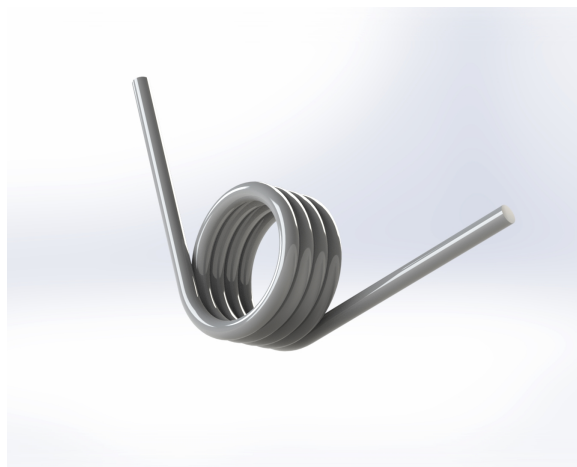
CAD of the finalized torsion spring with leg lengths machined off
